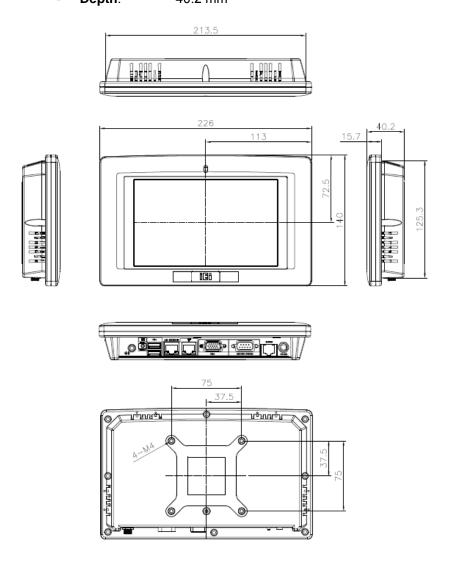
AFL-W07A-N26 Dimensions (mm)
